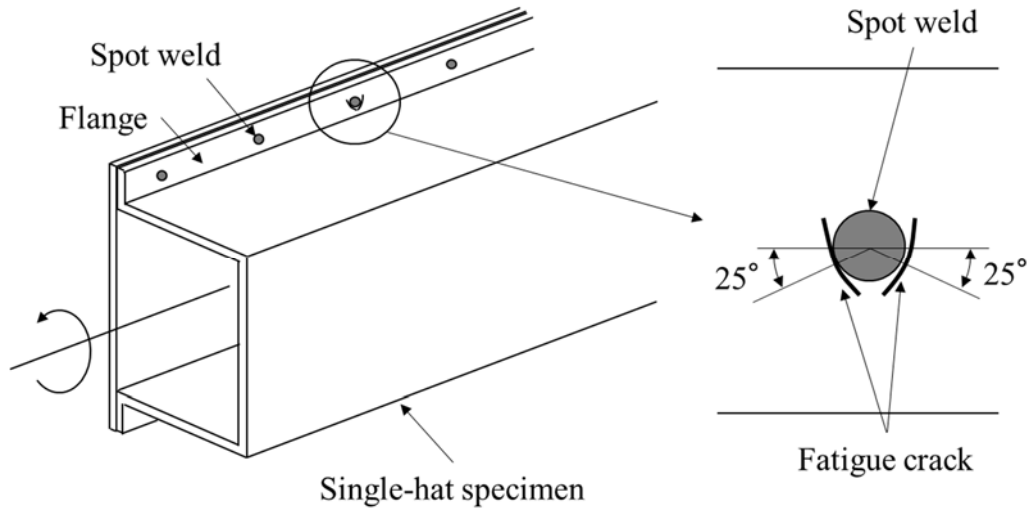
Spot welded single-hat specimen and fatigue failure mode.
